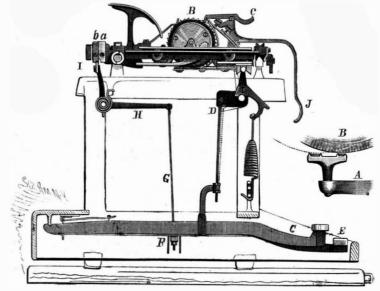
CARRIAGE SHIFTING MECHANISM.
